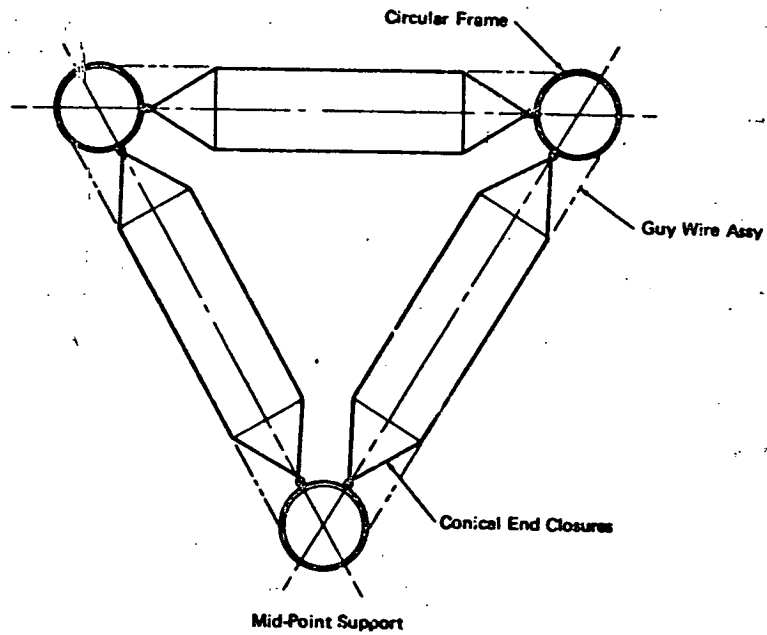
Cross Beam Arrangement at Intermediate Stations.
